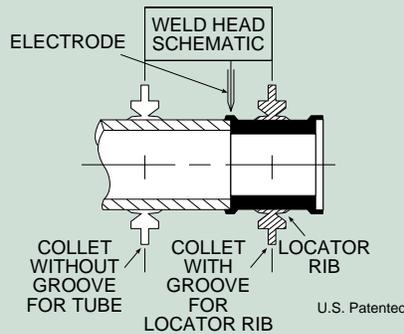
The Automatic Buttweld fitting has a locator rib positioned a fixed distance from the end weld collar.
